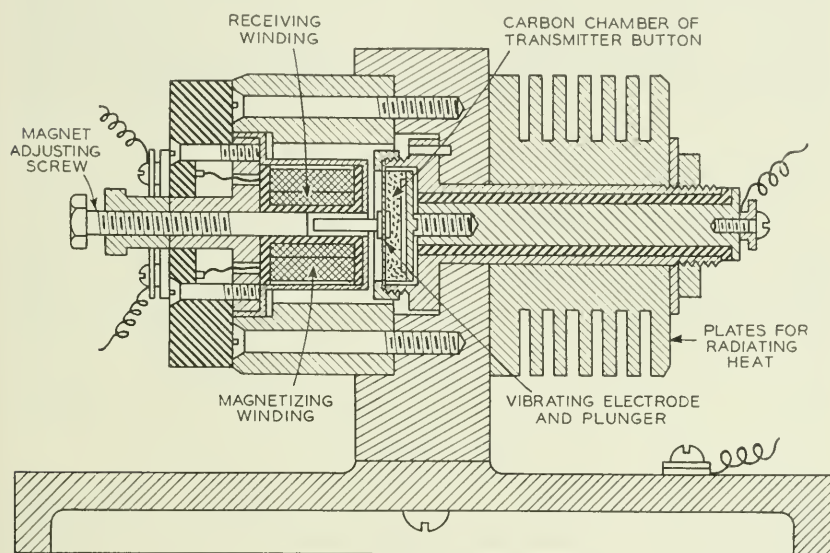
Cross-sectional drawing of a mechanical type of telephone repeater.
